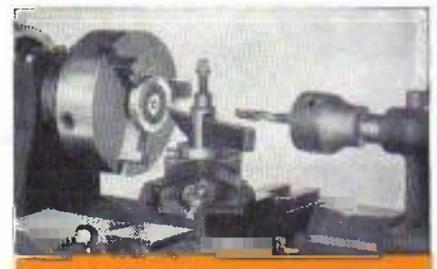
Drilling and Facing a Gear Blank Held in a Three-Jaw Chuck.
